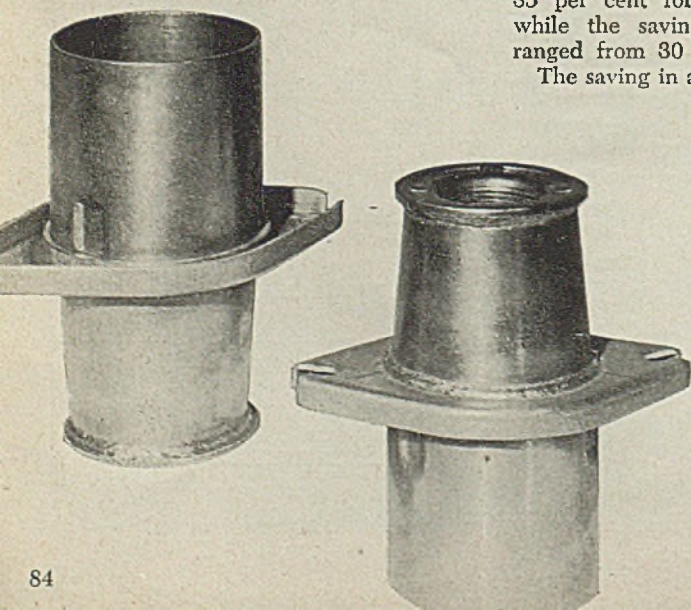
Flanges and glands are arc welded automatically to drawn steel tubing in making the new steel coupler cases
